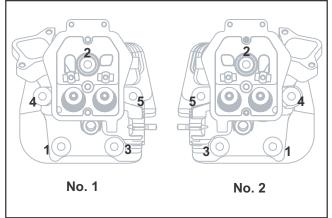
Cylinder Head Fastener Torque Sequence.
